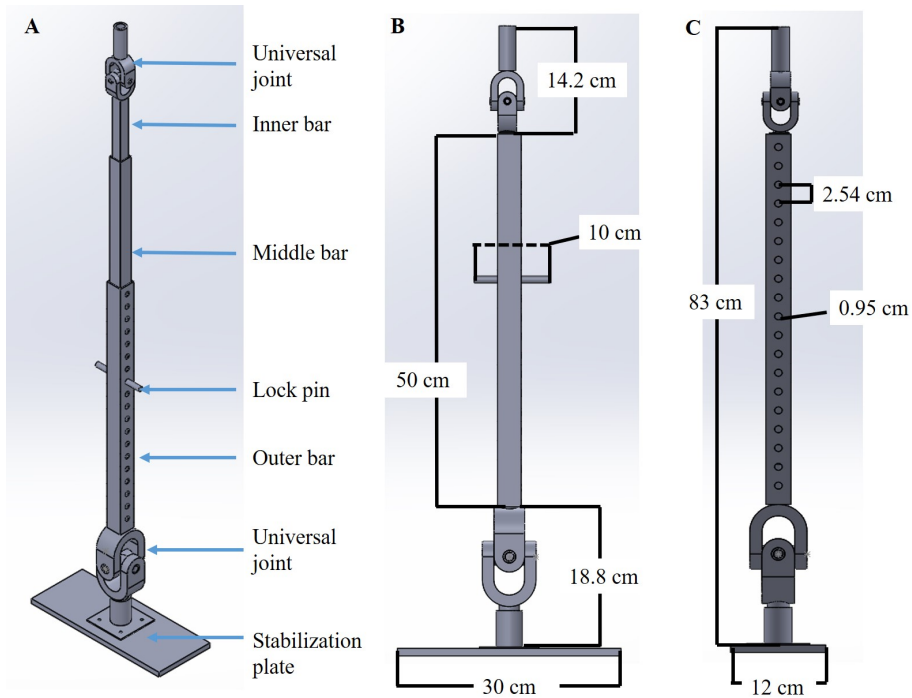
SOLIDWORKS CAD of the device to fix the tilt angle of the tilt table. A) CAD with all labeled components, B) Front view of CAD at shortest height with relevant dimensions, and C) Side view of CAD at shortest height with relevant dimensions
